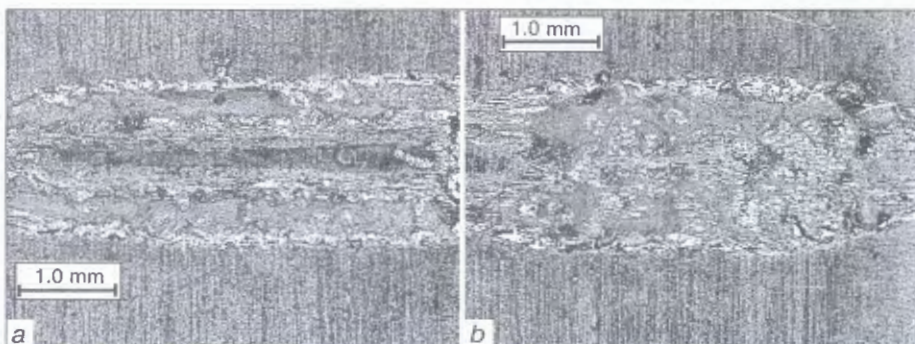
Fracture surface of a joint welded at constant (*a*) and increasing (*b*) compression force (wire diameter 1.4 mm, varnish «Thermko 210», welding time 0.71 (*a*) and 0.69 (*b*) s)
